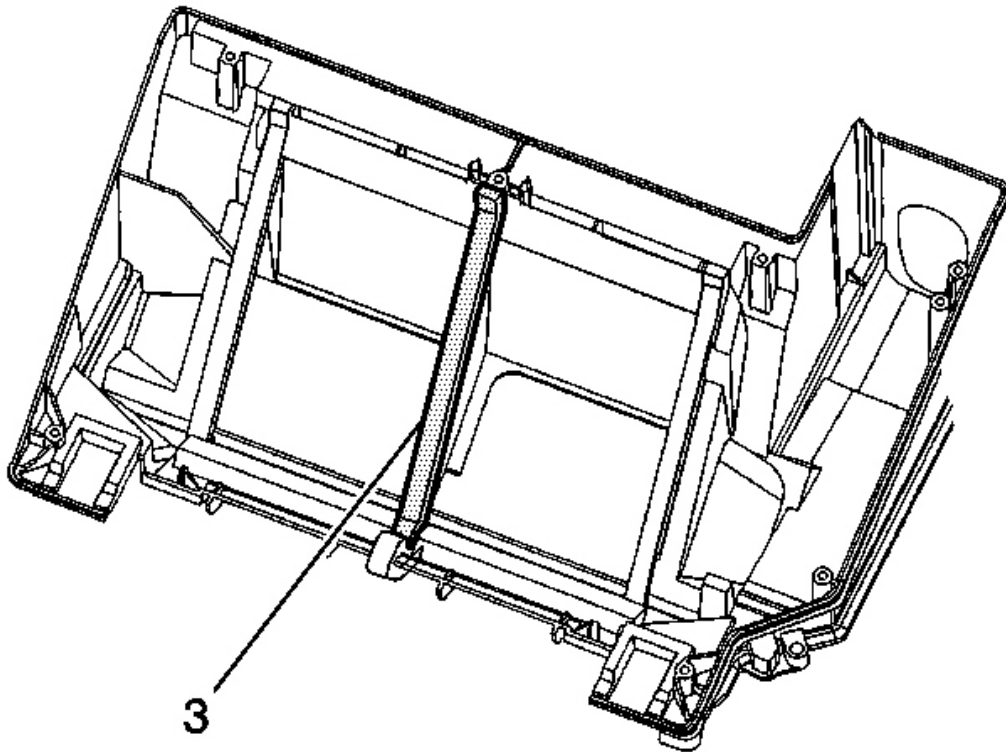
Lower HVAC Module Case & Heater Core Center Seal
